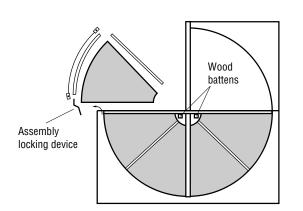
1. Use wood battens to secure the rotor. Remove assembly locking device at the periphery. Fit the first sector consisting of one or more segments.
